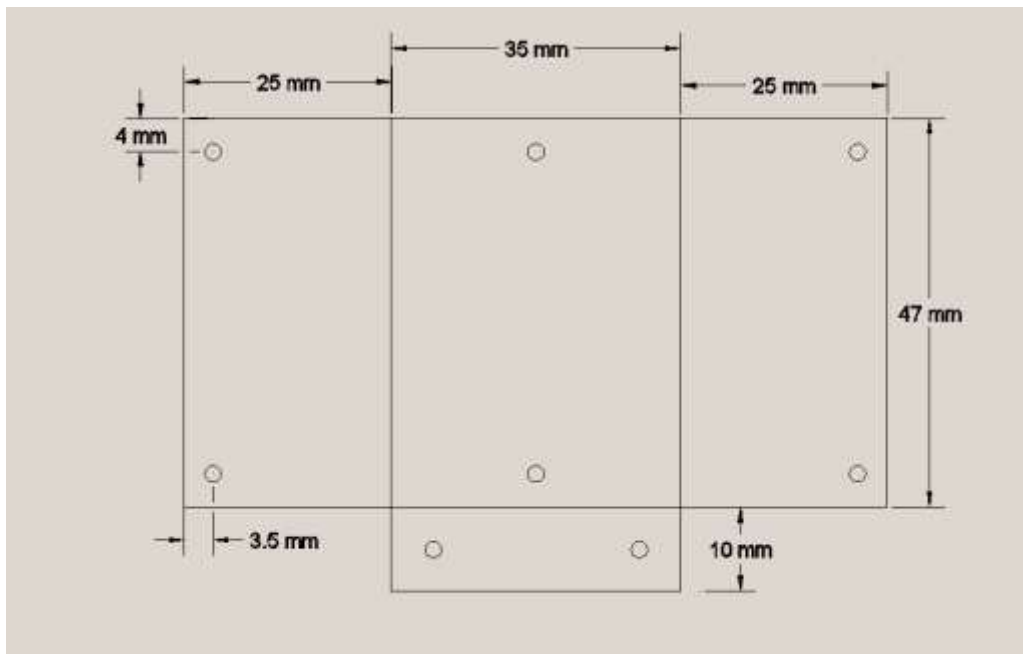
Micromouse Sensor Mount CAD Drawing
